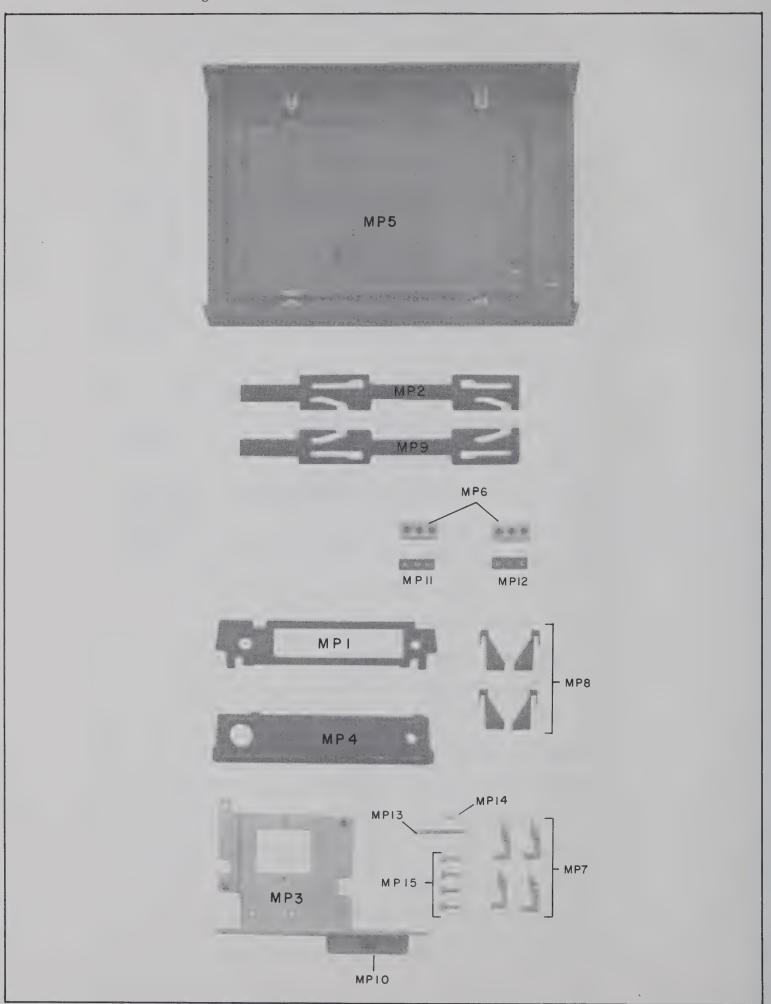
5310A Battery Pack Mechanical Parts Location
